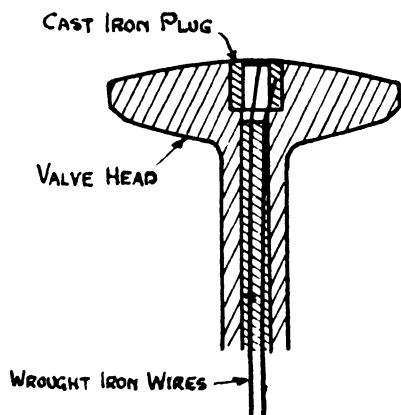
Thermo-couple employed for valve head temperature measurements.
